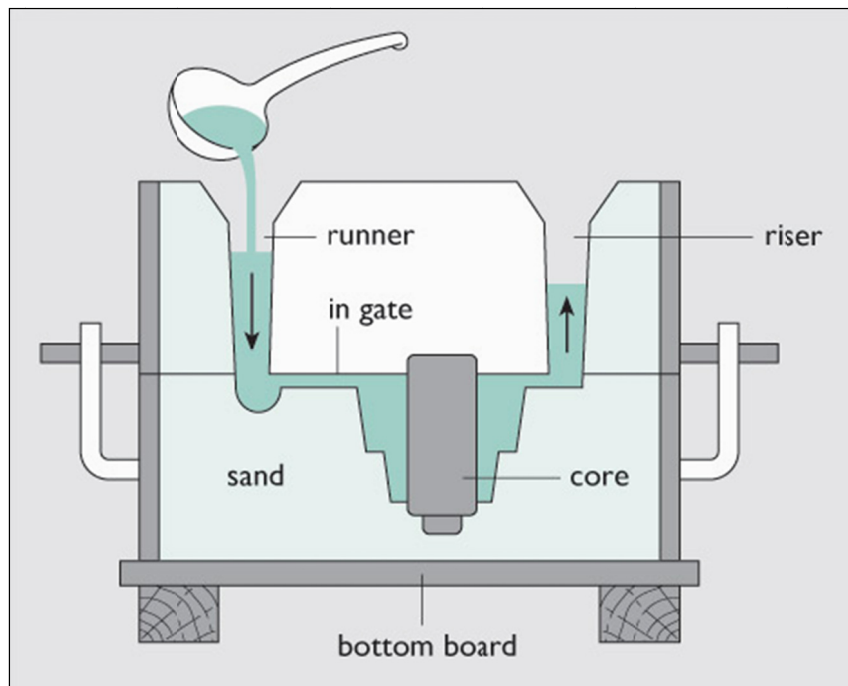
Typical design of sand casting system <www.shelmetcastings.com>
